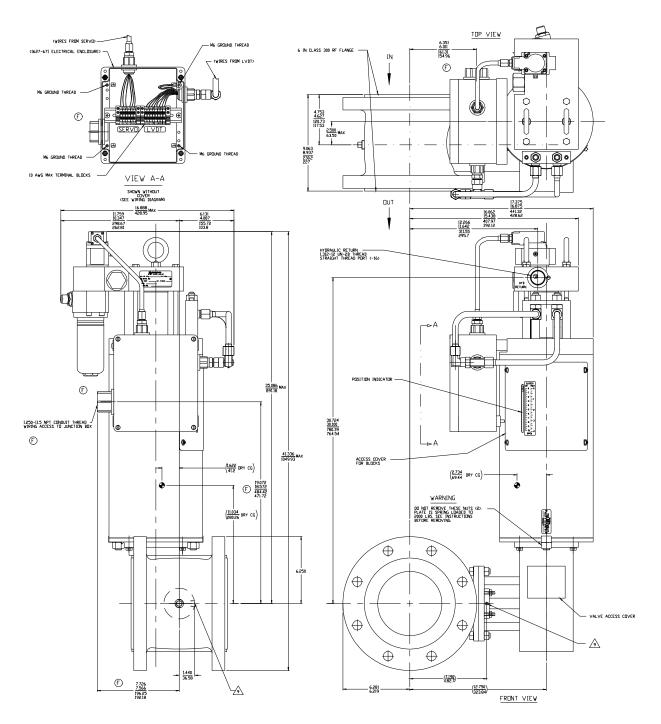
Gas Stop/Ratio Valve Outline Drawing (6-inch, except SS-260)
